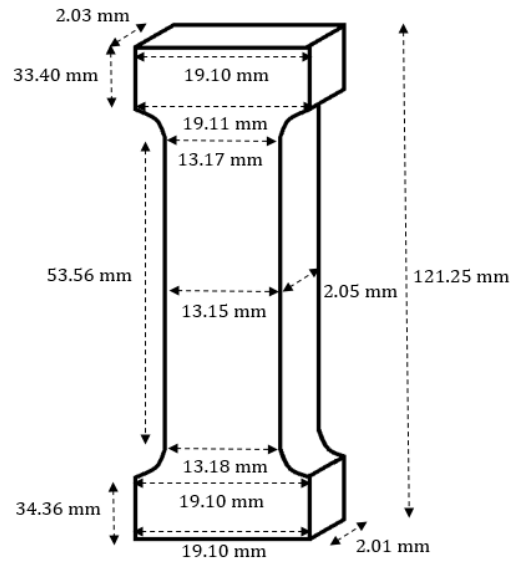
Dimensions of the dog bone when 3D printed at 71°.
